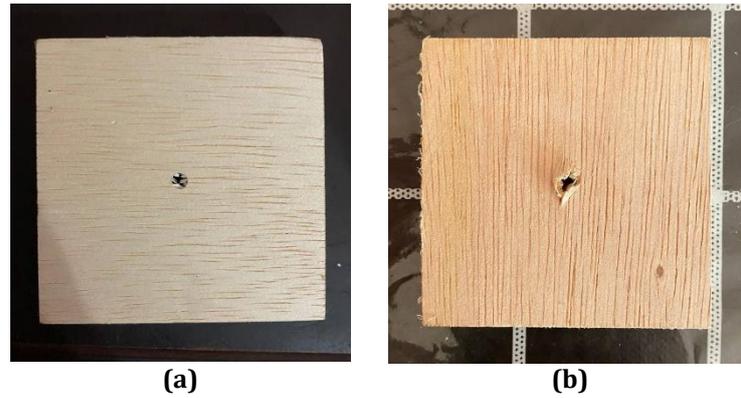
Wood panel drilled by (a) the prototype and (b) BOSCH GSR 120-Li Cordless Drill
